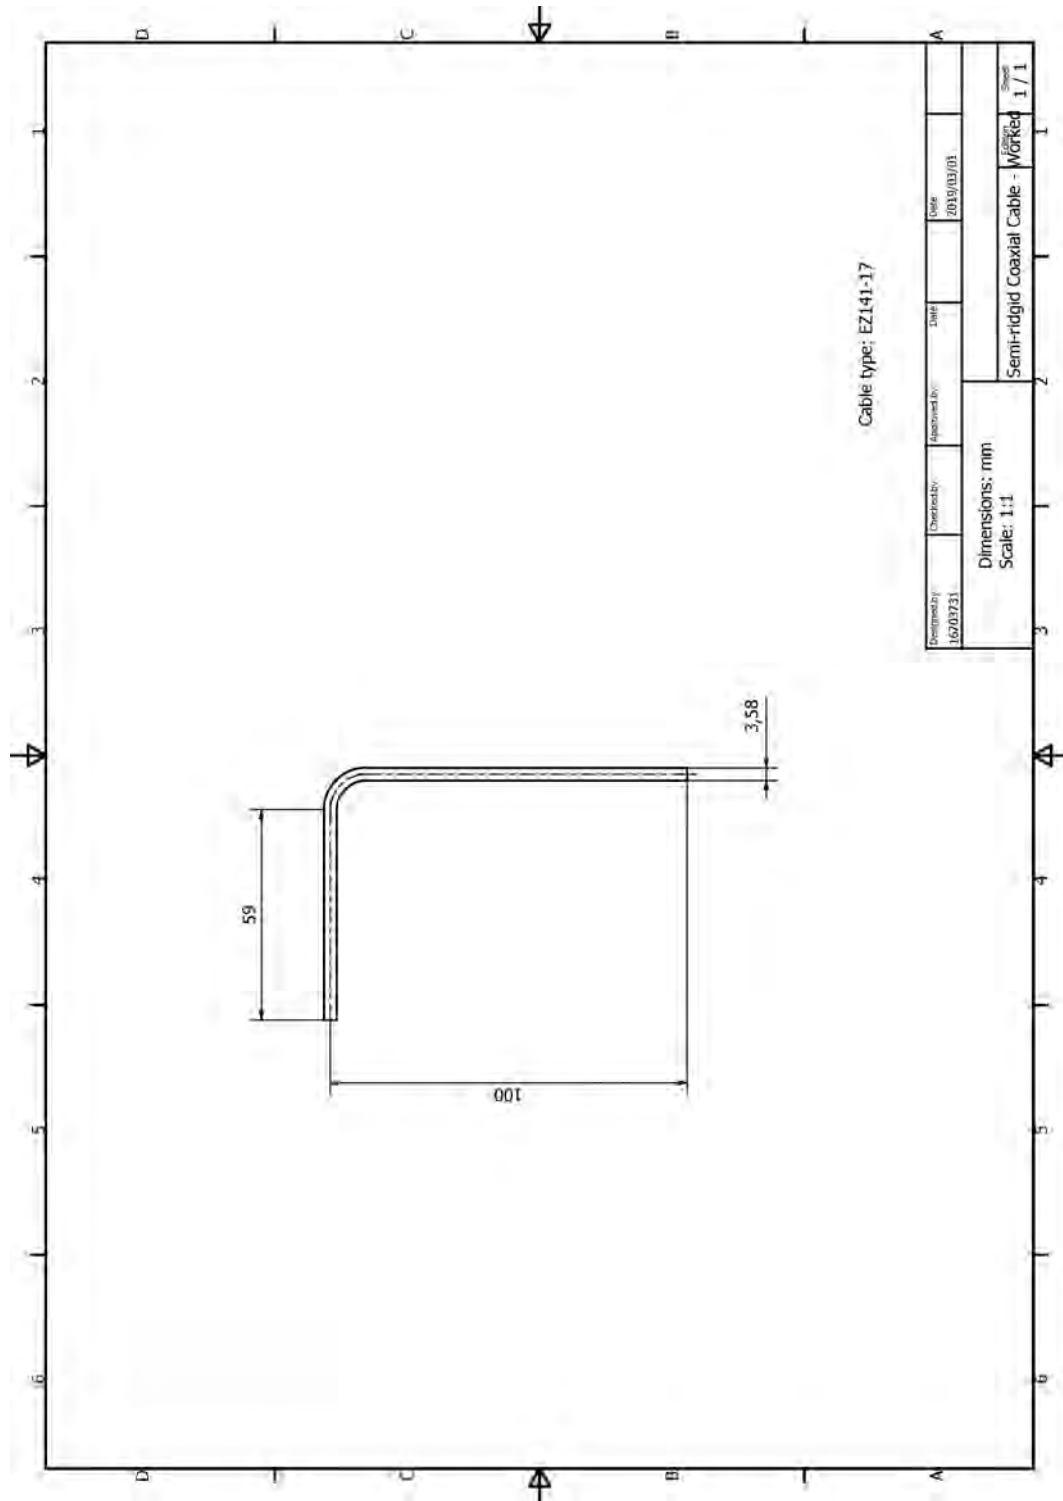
1:100 scale model semi-rigid coaxial cable engineering drawing. This engineering drawing shows the worked 50Ω semi-rigid coaxial cable which the sleeve balun is placed on and hold the antenna element in place, of both models.
